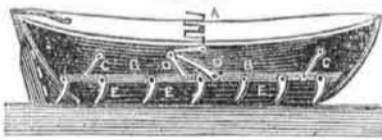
is a horizontal view. Fig. 2 is a side view. The same letters refer to like parts.
